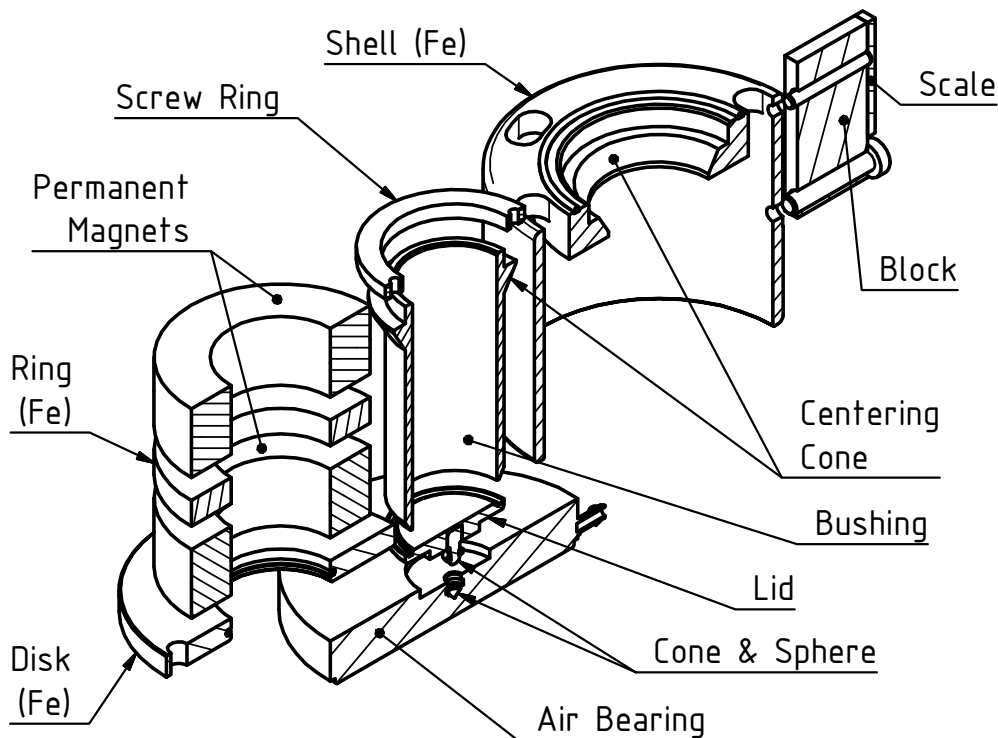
Explosional, cross-sectional view of the components of the passive base assembly
